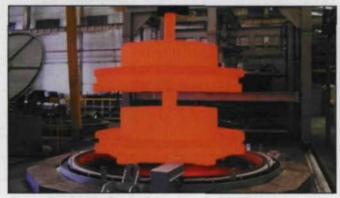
Just carburized gears are removed from a new furnace before quenching. Each gear has 78 teeth, each one 407 mm long, a module of 20, an outside diameter of 1,638 mm and is made of SCM420H, a JIS material specification. Hardness of carburized teeth is HRC 58~60, case depth is 5.5 mm.
